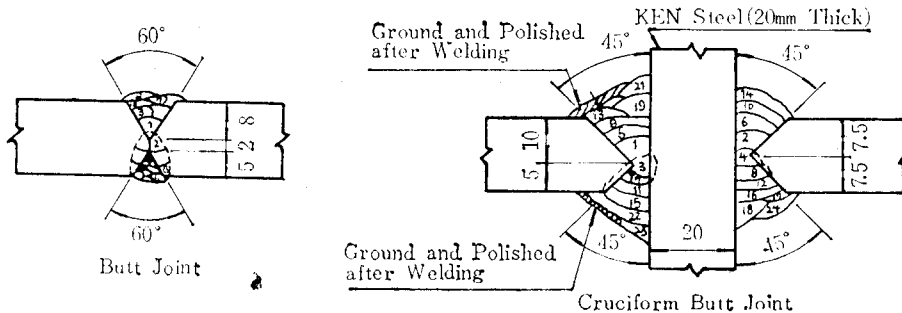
Details of specimens used in pulsating tensile fatigue test
